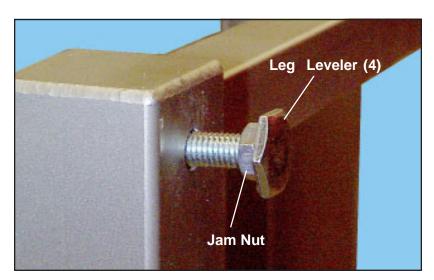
Leg Leveler with Jam Nut Mounted in Skid Bolt Hole
